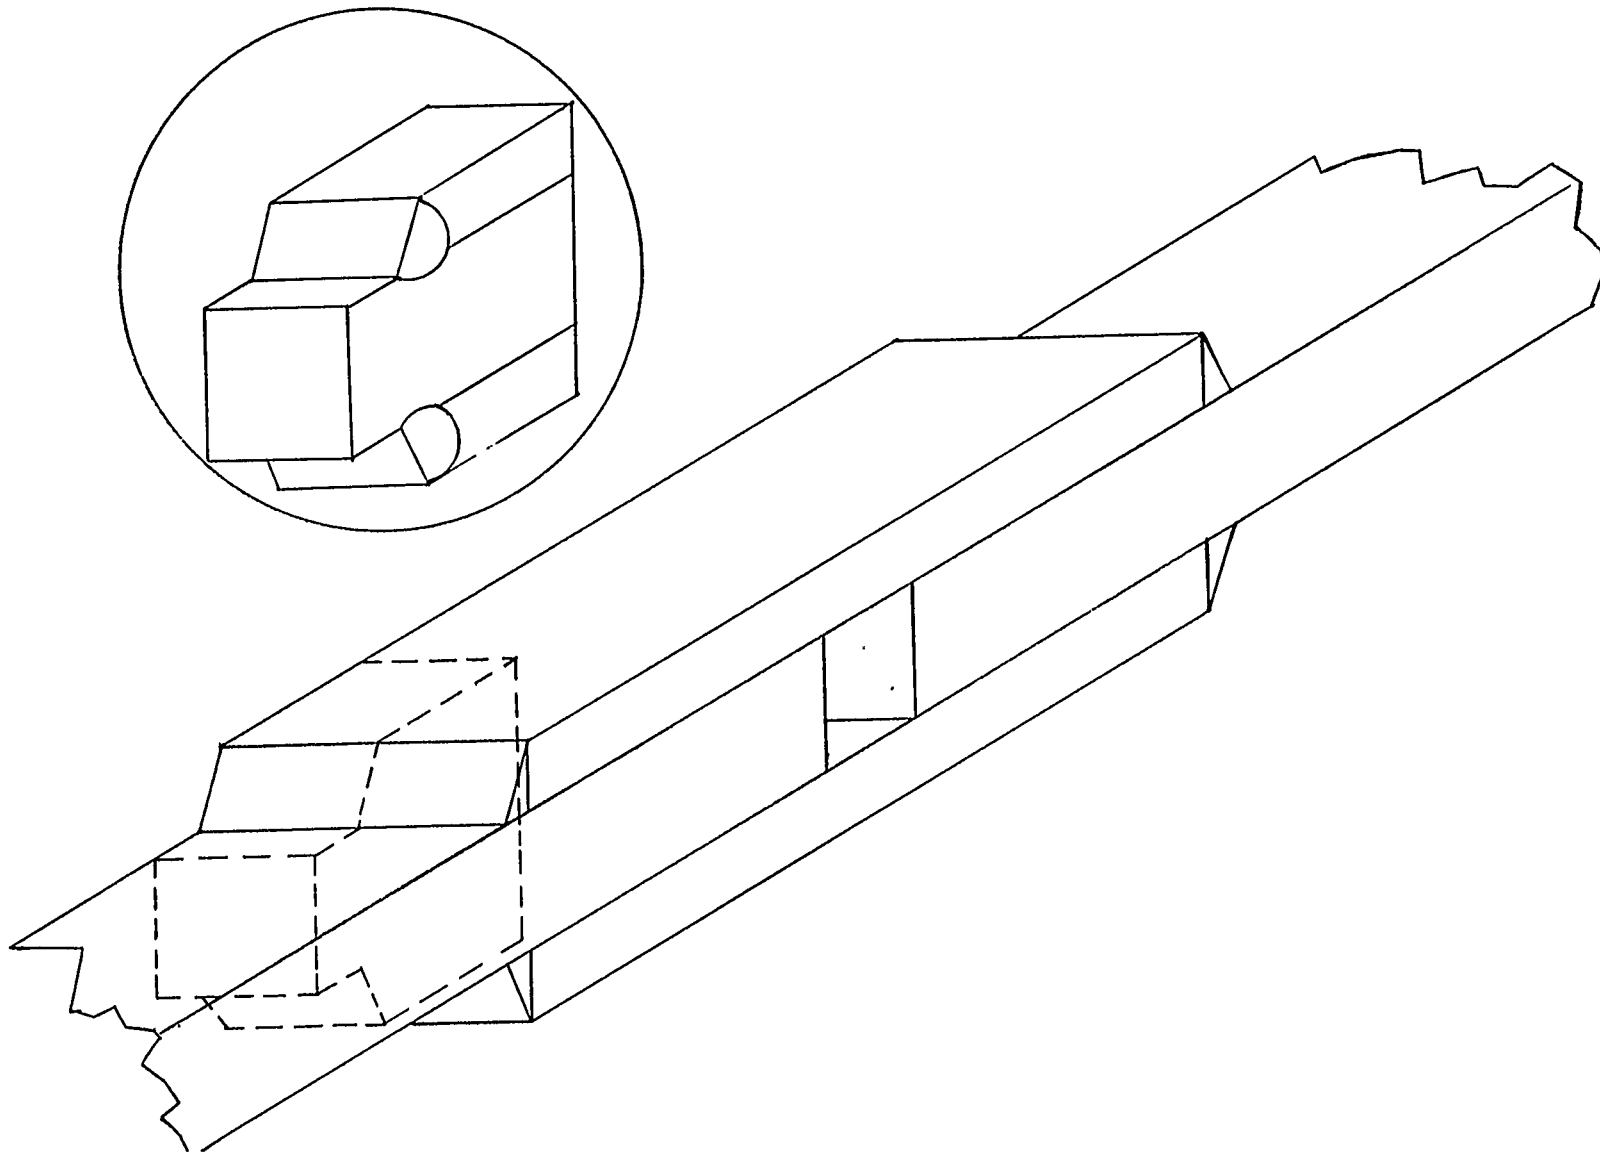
Typical Cross-Section Used for Macroetch of Transverse Fillet Weld Test Specimen
